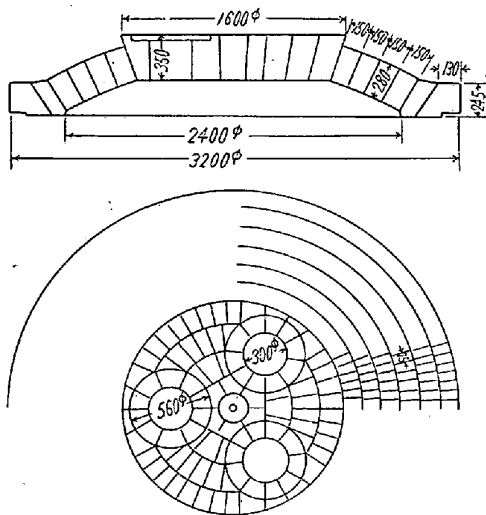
Bricklaying arrangement of the roof (5 ton furnace).
